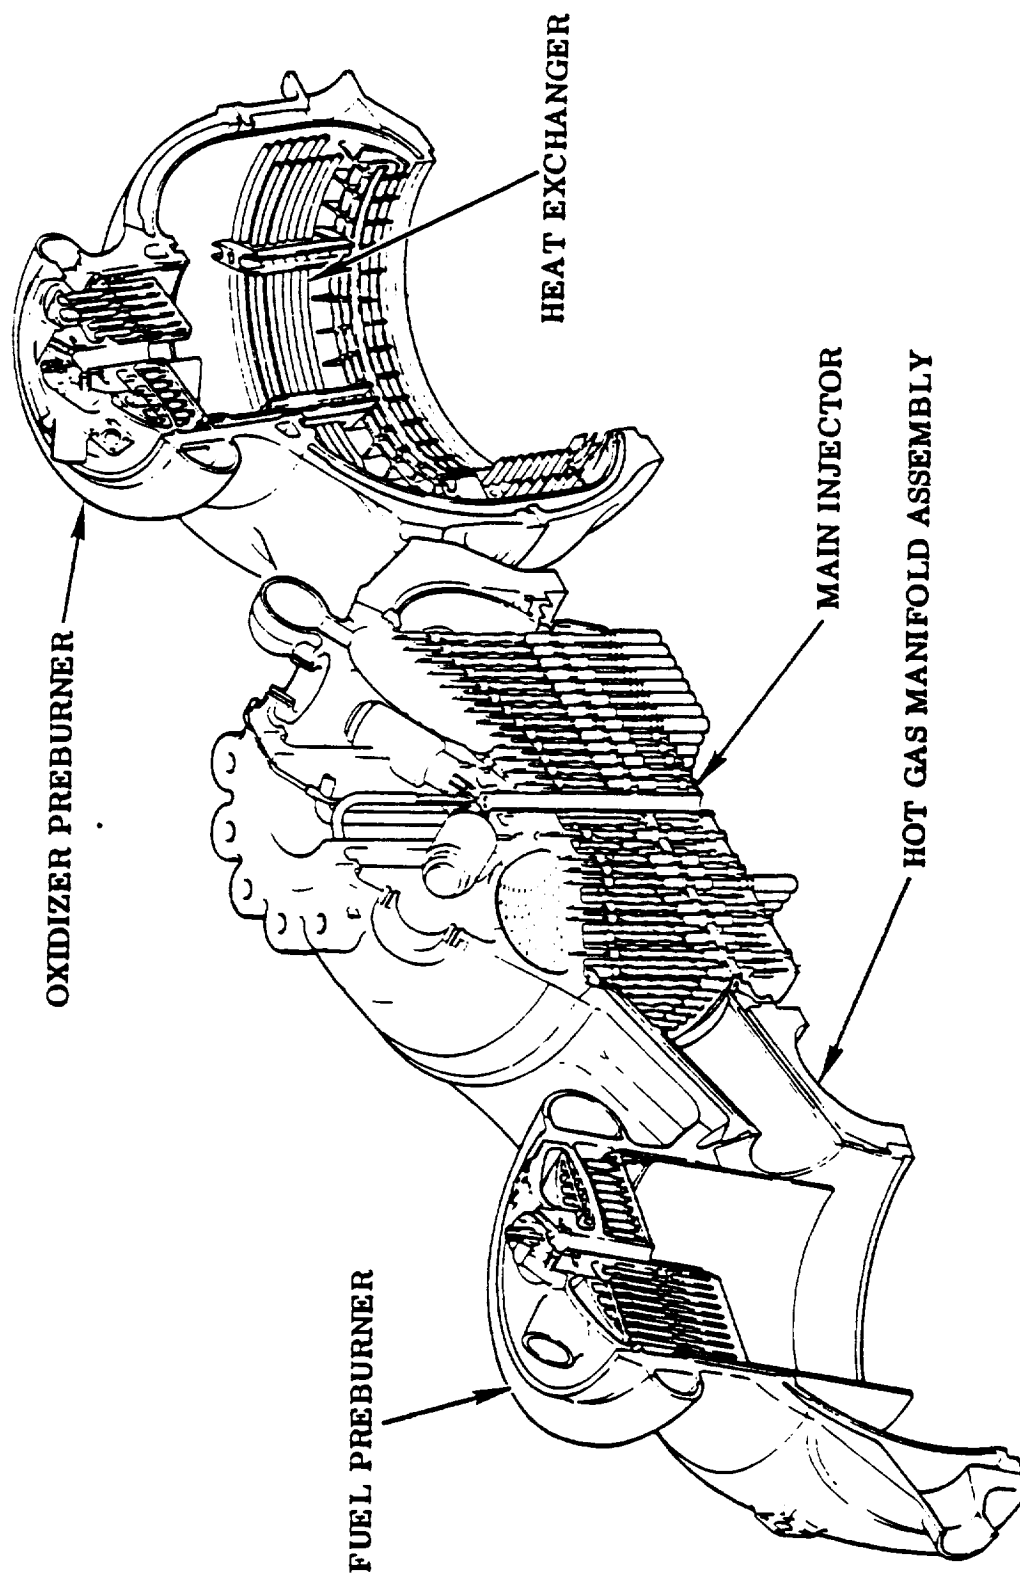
Cutaway View of Hot Gas and LOX Manifolds
